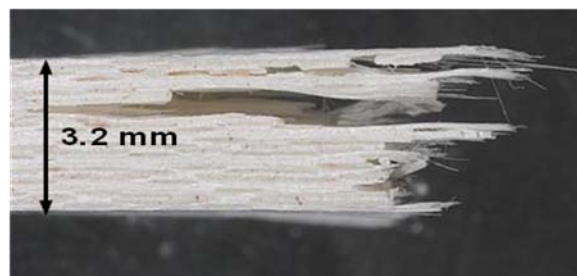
Fracture surface of the N720/AM specimen tested in creep at 109 MPa in laboratory air at 1100°C (side view).
